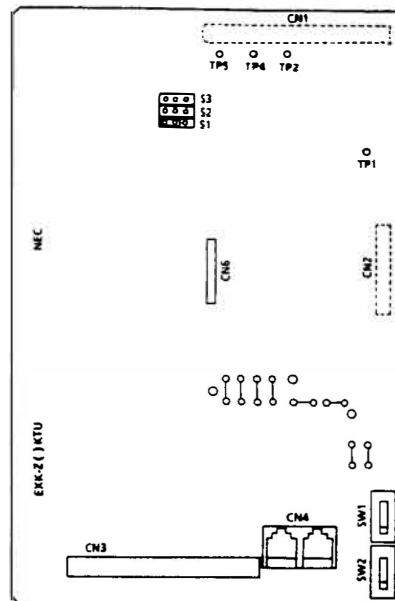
EXK-Z () KTU Switch and Connector Layout
